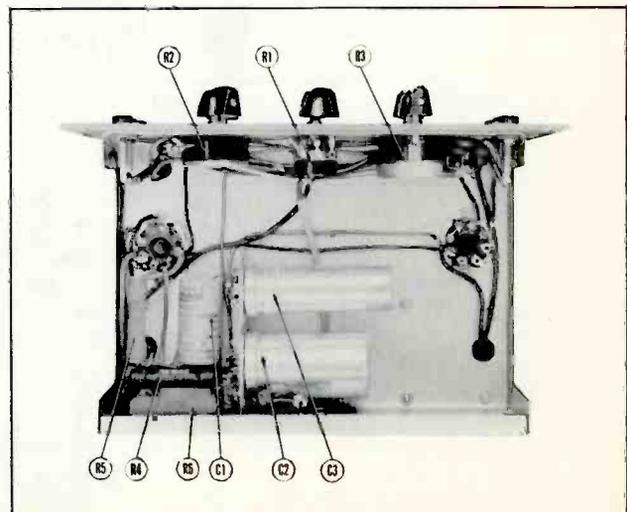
Bottom view of Impedance Measuring Device, without Null Indicator.
